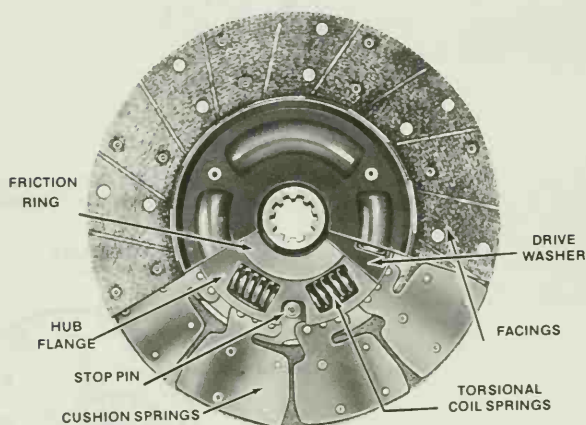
Cross-sectional view of a clutch disc. (General Motors Corporation)
